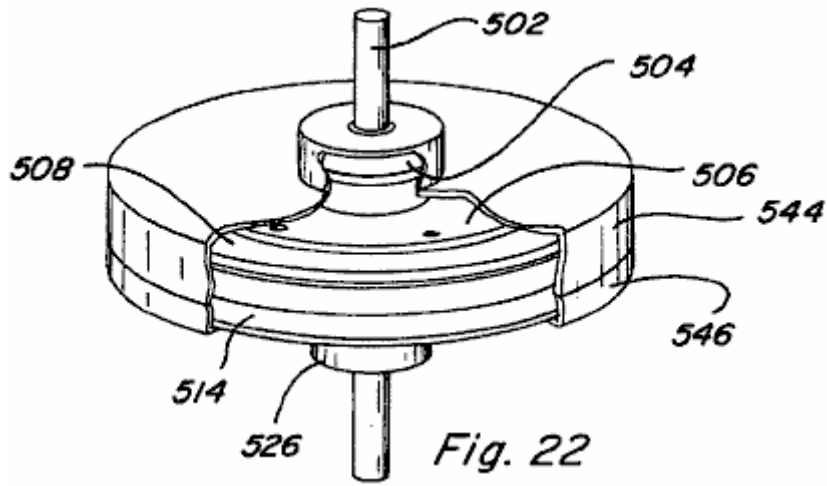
is an assembled, cut-away view of the rotary motion device of Fig.19 including a housing;
